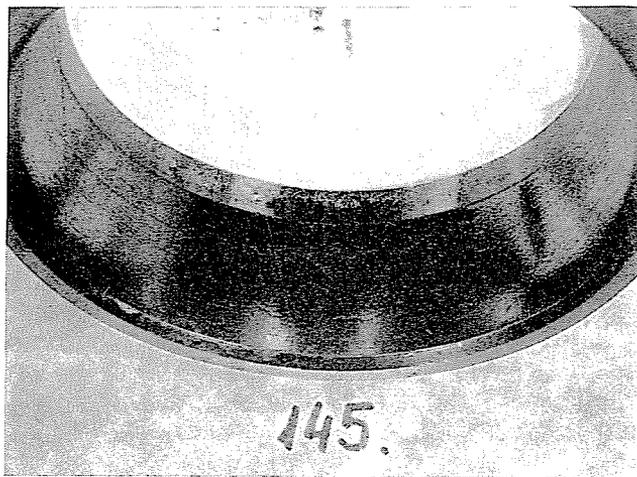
Failed outer bearing groove of a used bearing type 32308
